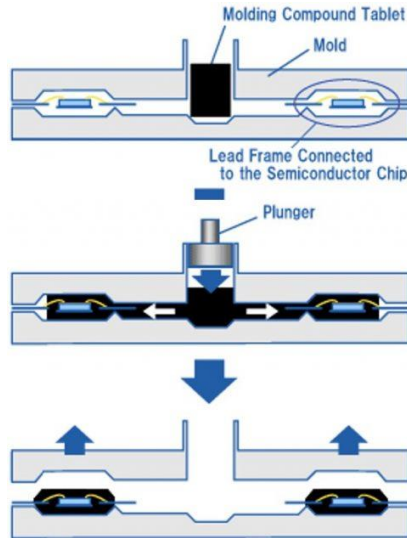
Step by step illustration of a transfer molding process, where a pellet-type EMC is used in order to encapsulate a semiconductor chip. Figure taken from [70].
